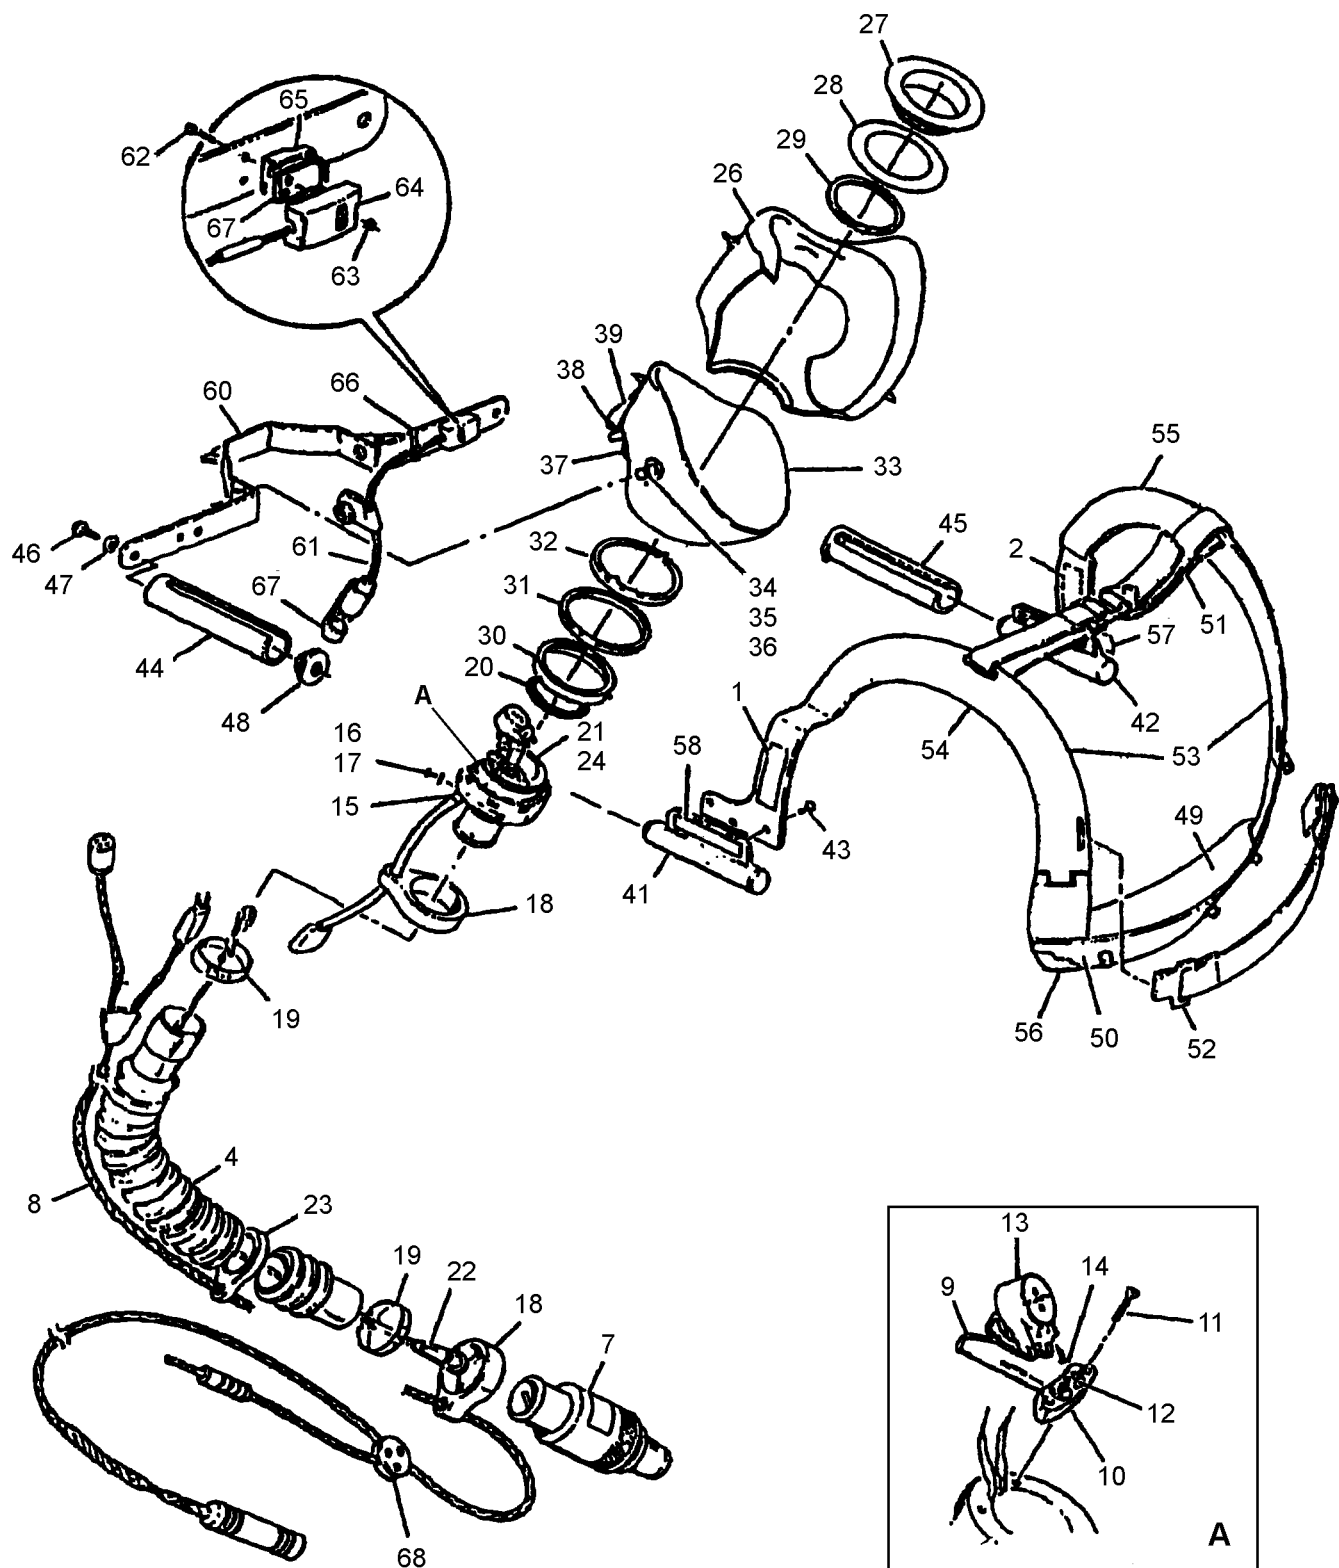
Folding, Quick-Donning Mask Assembly, Exploded View (Sheet 2)
